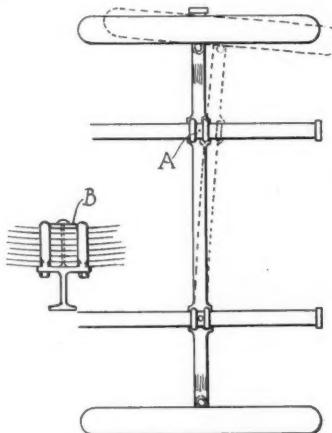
How the front axle of a car was thrown out of alignment because of the shearing of a spring bolt
